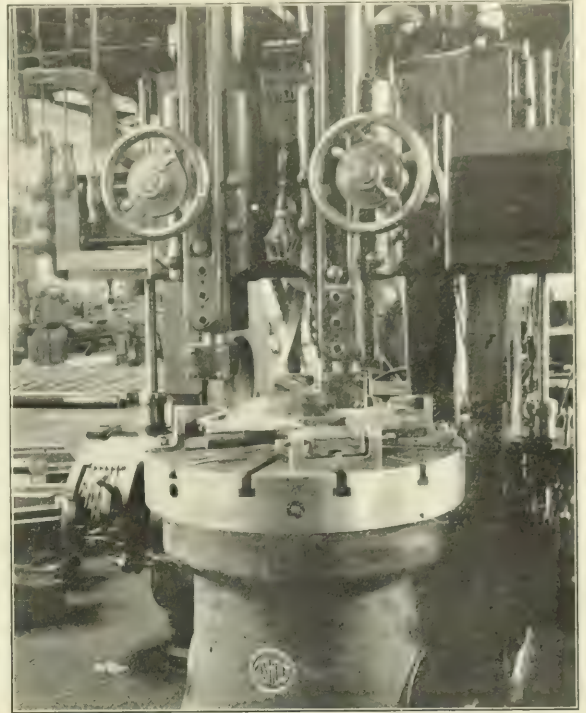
Eccentric Strap Chuck as Used on Boring Mill.
